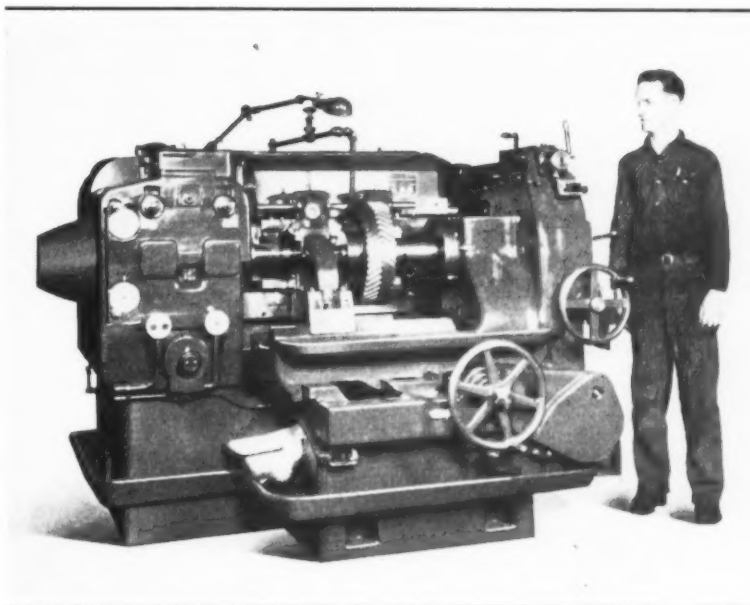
Sykes Gear Generator which will Cut Spline Shafts, Cams, and Cylindrical Surfaces, in Addition to Gears
